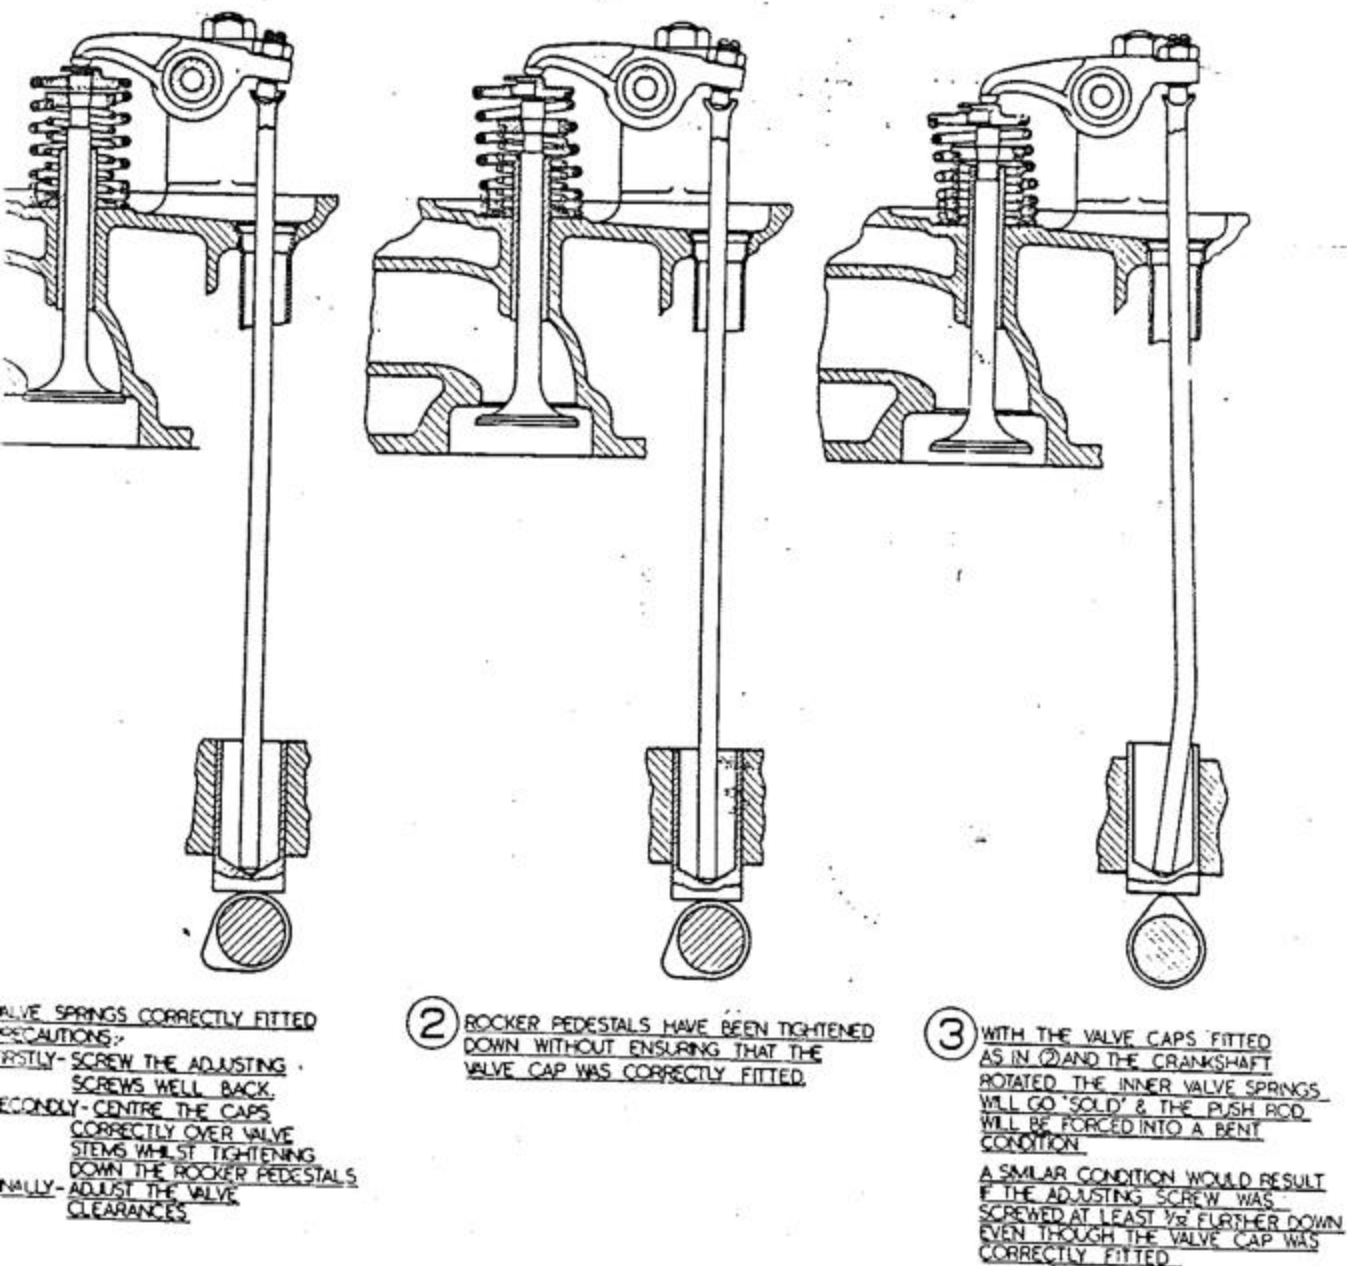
Precautions required when fitting valve rocker shaft assembly
